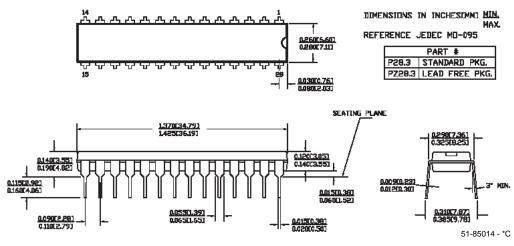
28-Lead (300-Mil) Molded DIP
